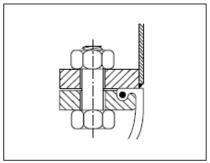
Sharp edge pipe ends will damage the rubber face.
